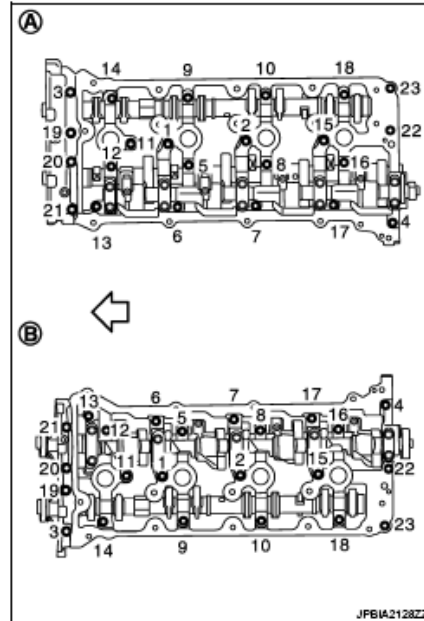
Identifying Camshaft Mounting Bolts Loosening Sequence
